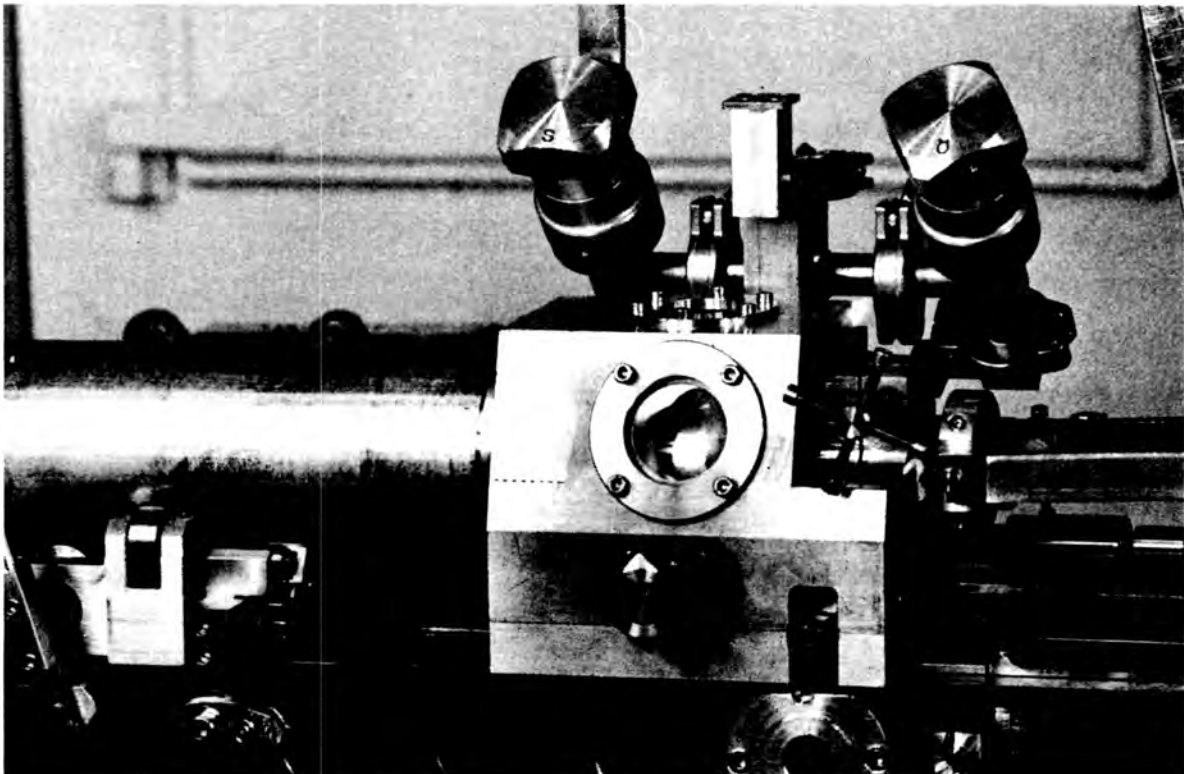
Chamber for Evactuation, He-refilling, Welding and Leak Testing.
